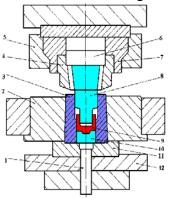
An extrusion assembly tool on the hydraulic press 250 tf WPA (TPS)
